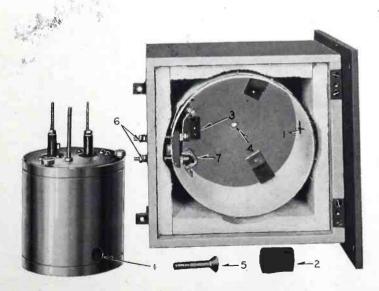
CRYSTAL WELL ASSEMBLY AND HEATER BOX
